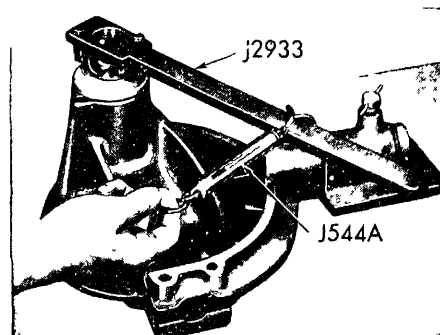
Measuring pinion bearing preload with spring scale, 1947-52
